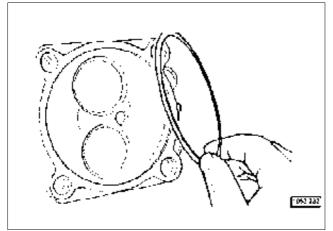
Fit gaskets between cylinder heads and cylinders (see instructions on page 27);
